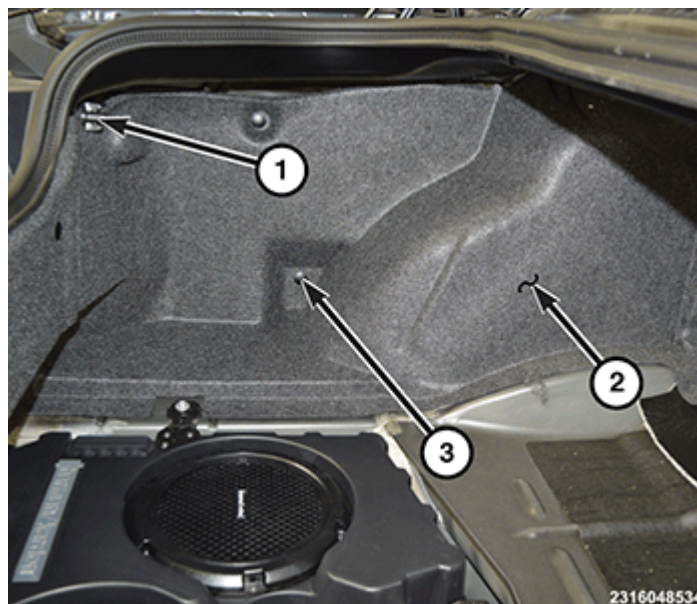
Plastic Nut, Wheel Well Carpet & Push Fasteners
